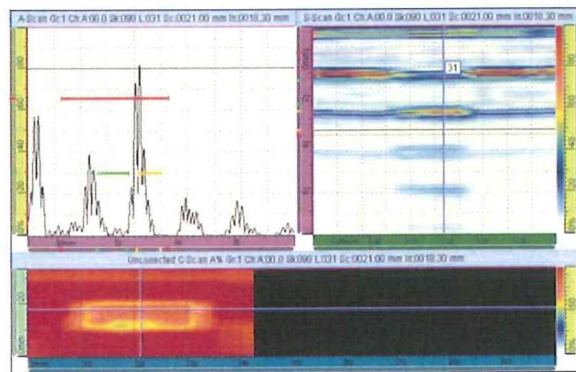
PA Scan of USW141001-05 which is welded with 720 [J].
